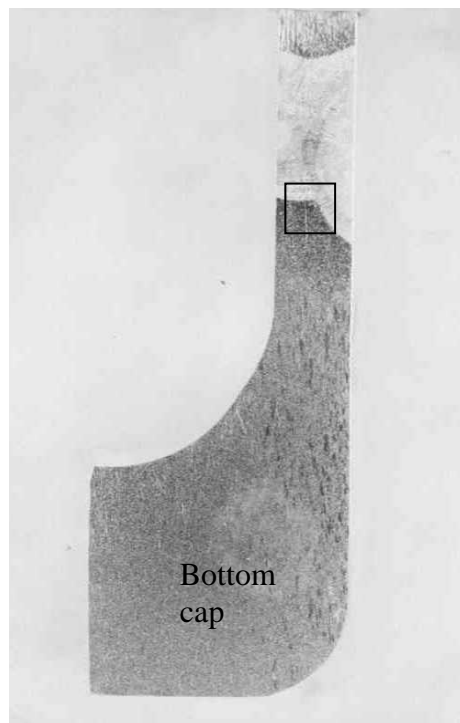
Metallographic section of bottom cap of can 1 showing fabrication weld. Area within box enlarged in Figure 11.
